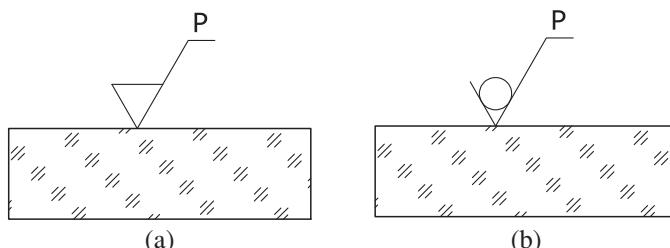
Surface texture symbols from ISO 10110-8 for (a) polished surfaces and (b) molded surfaces.
